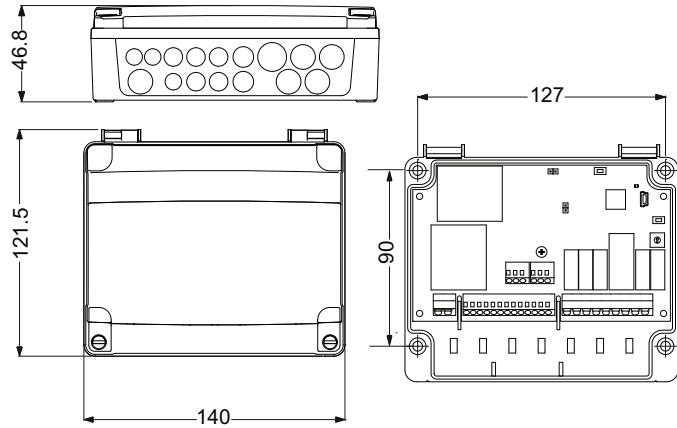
Dimensions (mm) AHS2-0MM unit.
